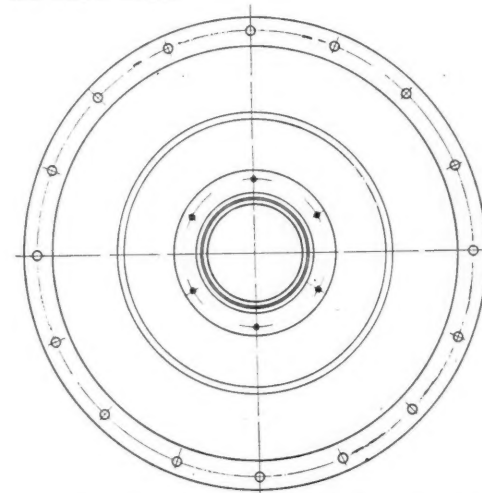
Spoke Type Cast-Steel Front Wheel
